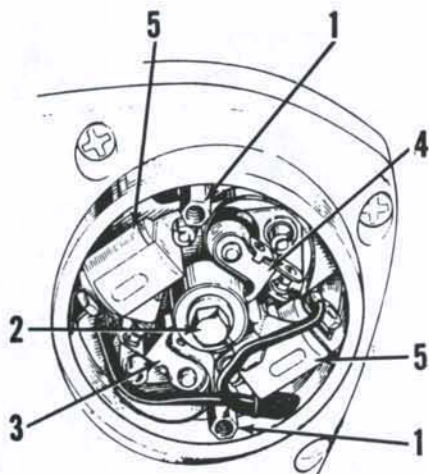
The ignition cam and advance assembly is mounted on the right end of the camshaft. Black and yellow wire goes to breaker points (3) and black and white wire goes to breaker points (4).
